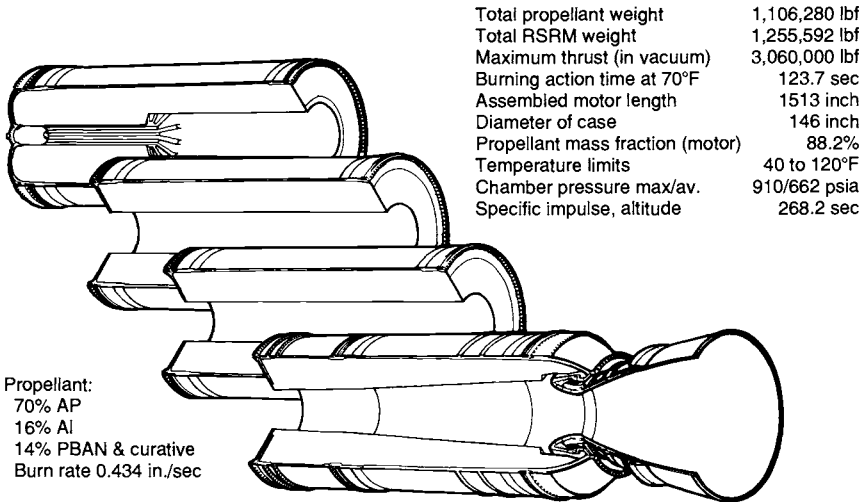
Simplified diagram of the four segments of the Space Shuttle solid rocket motor. Details of the thrust vector actuating mechanism or the ignition system are not shown. (Courtesy of NASA and Thiokol Propulsion, a Division of Cordant Technologies, Inc.)
